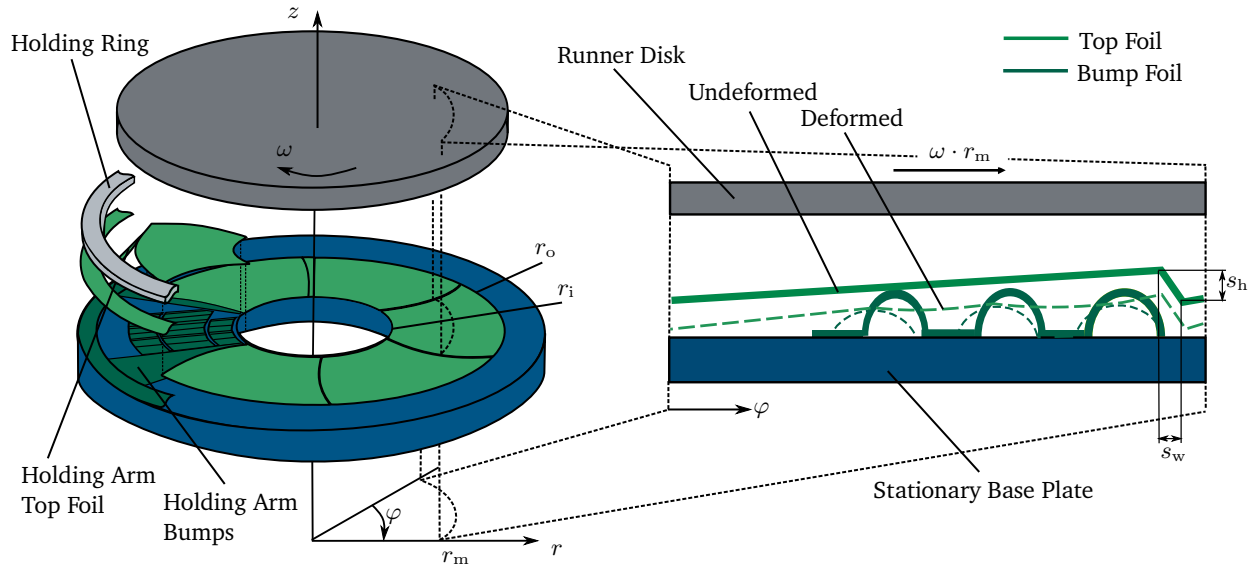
Sketch of the foil bearing assembly. Consisting of stationary surface as base plate, bump foil, top foil, and disk.
